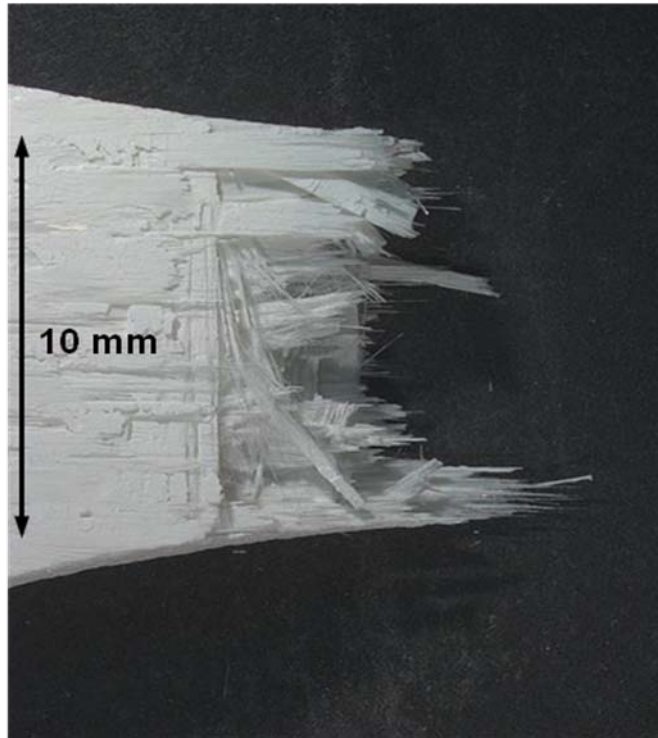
Fracture surface of the N720/AM specimen tested in tension to failure with constant loading rate of 25MPa at 1100°C in steam.
